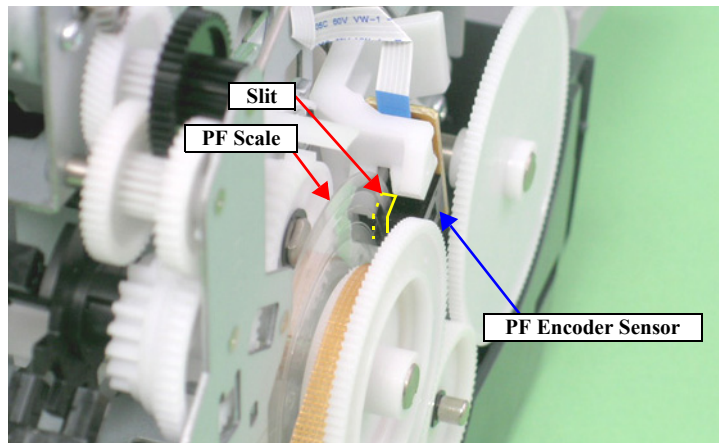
Reinstalling the PF Encoder Sensor Holder
